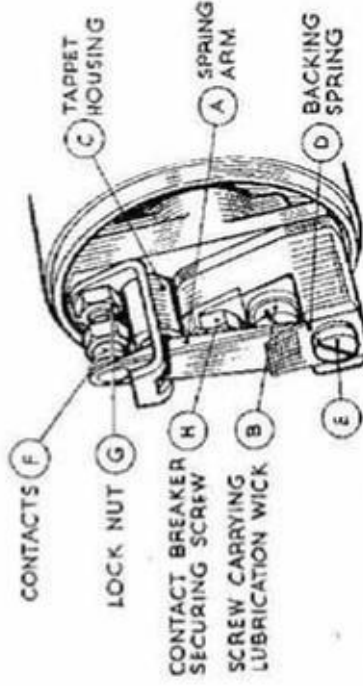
FACE CAM CONTACT-BREAKER OF LUCAS MAGNETO SHOWN ASSEMBLED
